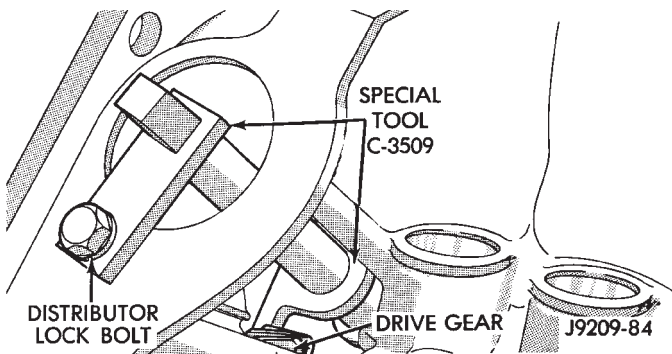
Camshaft Holding Tool C-3509 (Installed Position)
